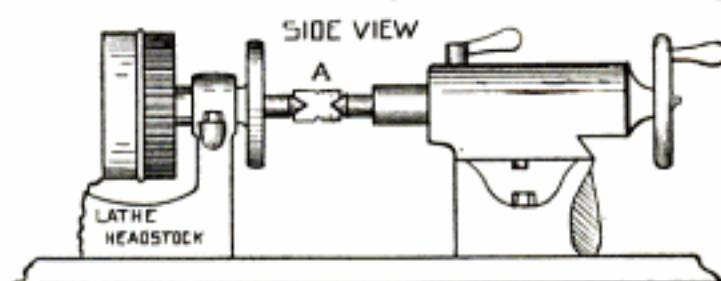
SHOWING GAUGE ON LATHE CENTERS AT A.
